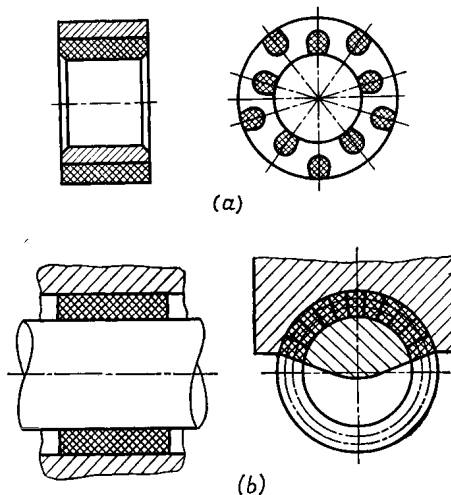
Sliding bearings with transfer lubrication by inserts
